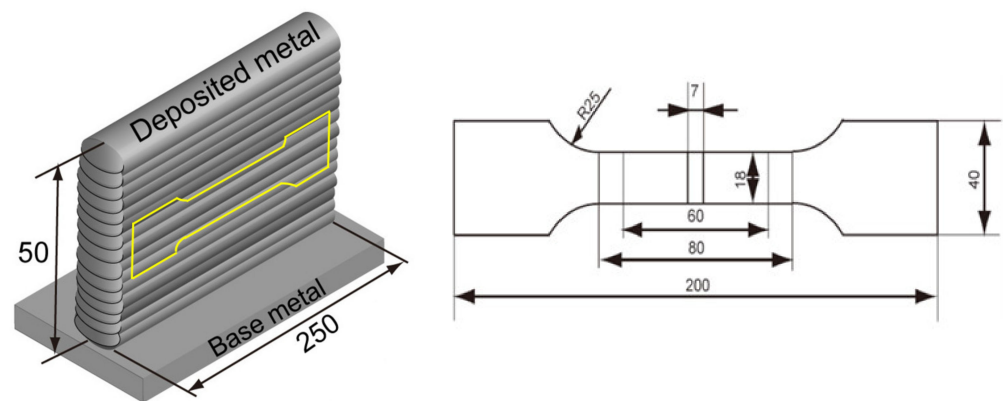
Large wall-type sample and cut-off plan for tensile test specimen (JIS Z2201 No.14-B).
